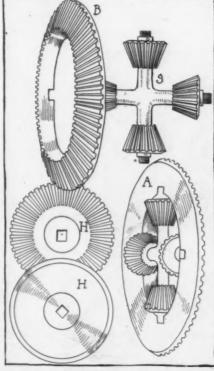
PARTS OF THE ORDINARY DIF-FERENTIAL GEAR
